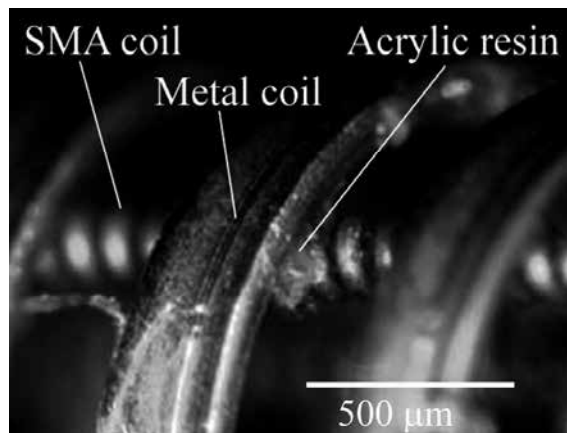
Connection between SMA coil and metal coil formed by electrodeposition of acrylic resin
